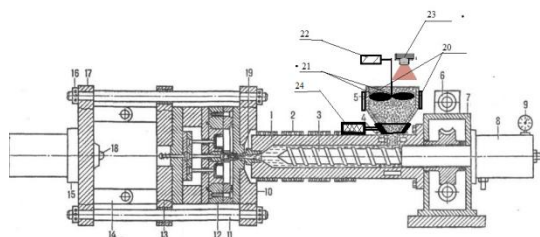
Of principle chart of castable machine for casting under constraint: 1 — material cylinder; 2 — heating elements; 3 — screw (auger); 4 — cooling channels; 5 — material hopper; 6 — hydraulic engine; 7 — gearbox; 8 — hydraulic cylinder injection unit; 9 — manometer; 10, 17 — fixed plates; 11 — guide columns; 12 — injection mold; 13 — movable plate; 14 — wheel-lever mechanism; 15 — hydro-cylinder of the clamping unit; 16 — nuts; 18 — emphasis; 19 — nozzle, 20 — bunker heaters, 21 — blades for mixing the mixture, 22 — mixer drive, 23 — IR control camera, 24 — drive and rotary device for the entire bunker
